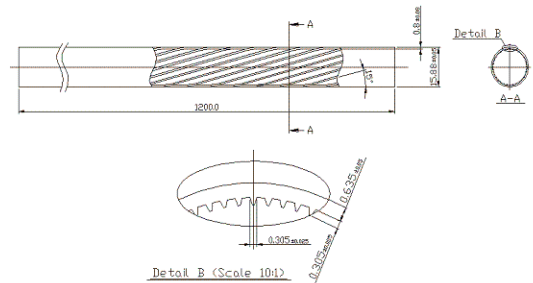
Cross-sectional view of helical grooved thermosyphon
